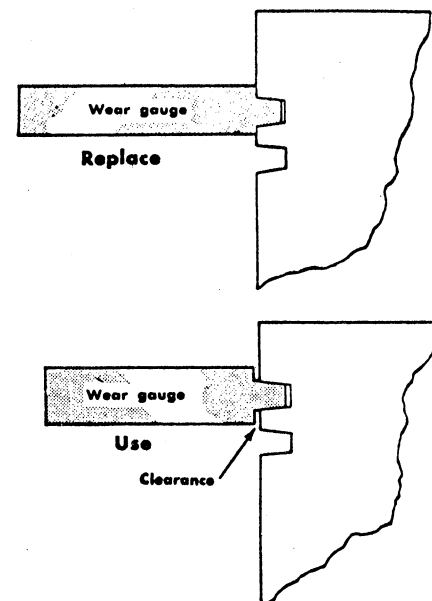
Use JDE-55 Wear Gage to check keystone ring groove wear. Diagram at top shows gage inserted in worn ring groove, and lower diagram shows gage in a good ring groove. Renew piston if gage contacts ring land.
